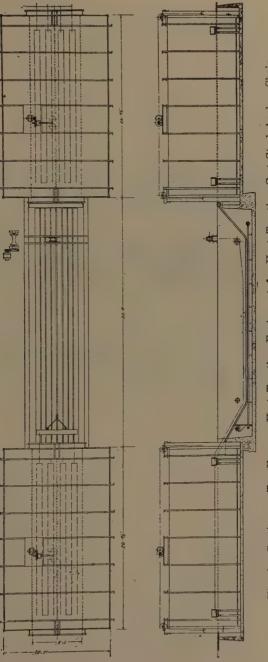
Continuous Two-Furnace Heat Treating Equipment for Heat Treating Cast Steel Anchor Chain.
